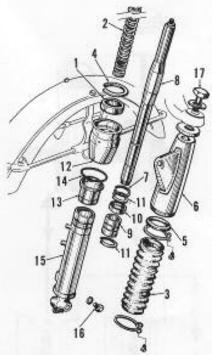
Exploded view of early CL front suspension unit. Early CB models are similar.
